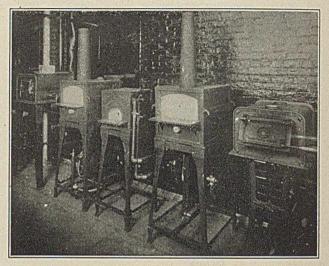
OVEN FURNACES AND RIVET HEATERS
